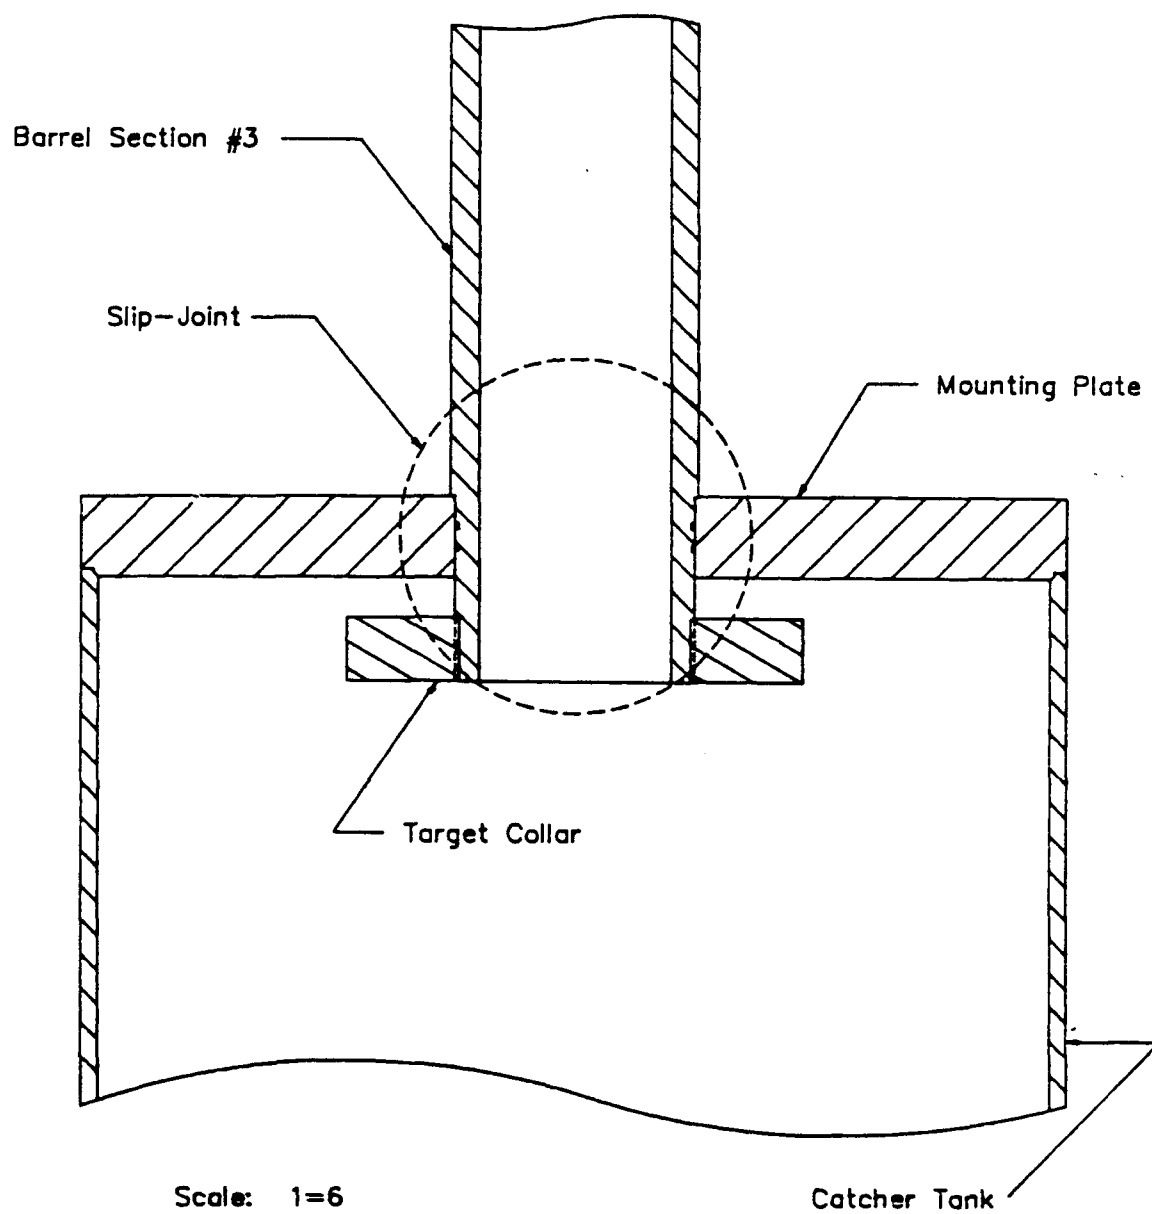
View of Barrell Slip-joint in Mounting Plate.
